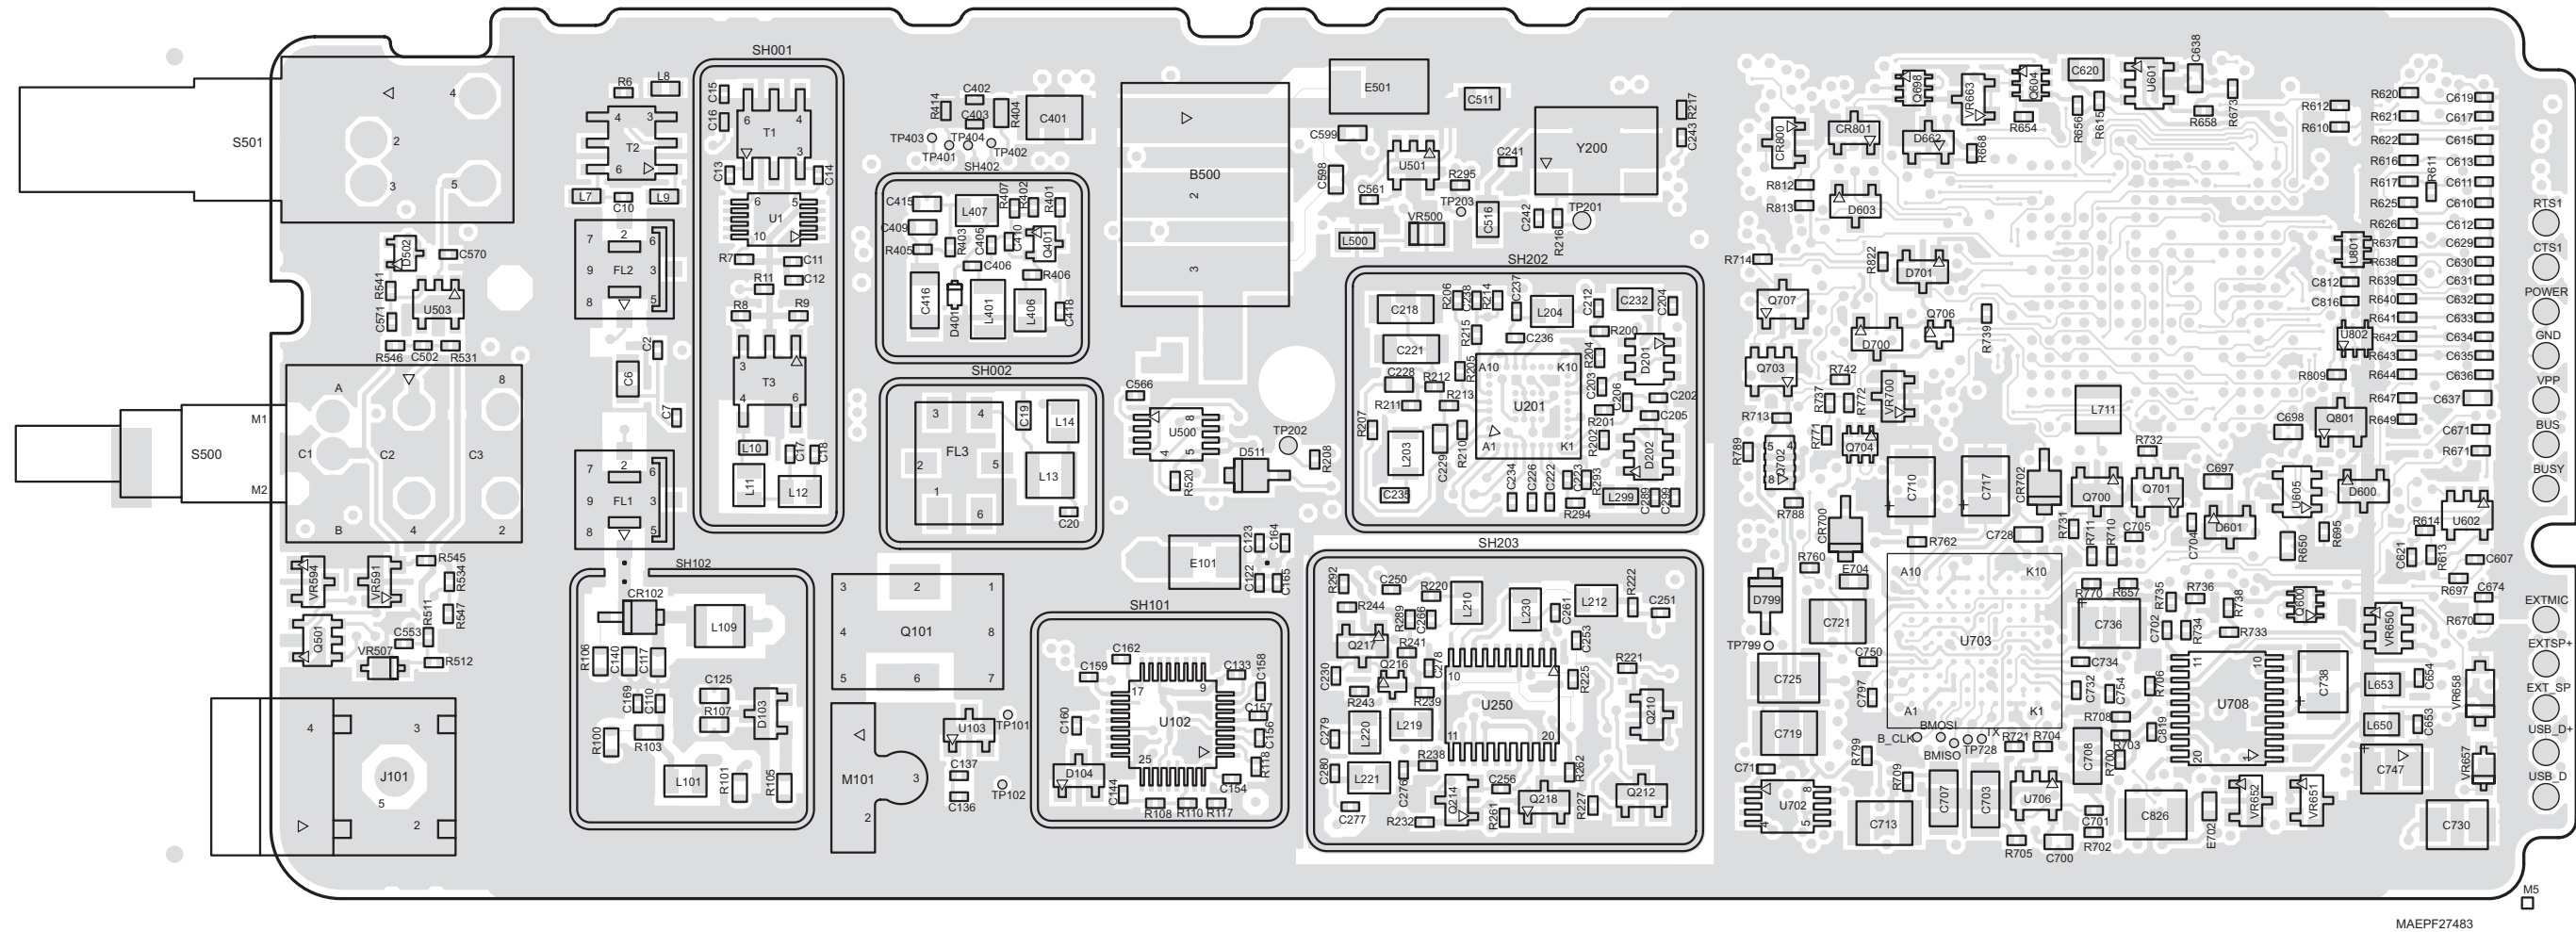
PMUF6541D/F Main Circuit Board Component Location Detail, Viewed from Side 2
